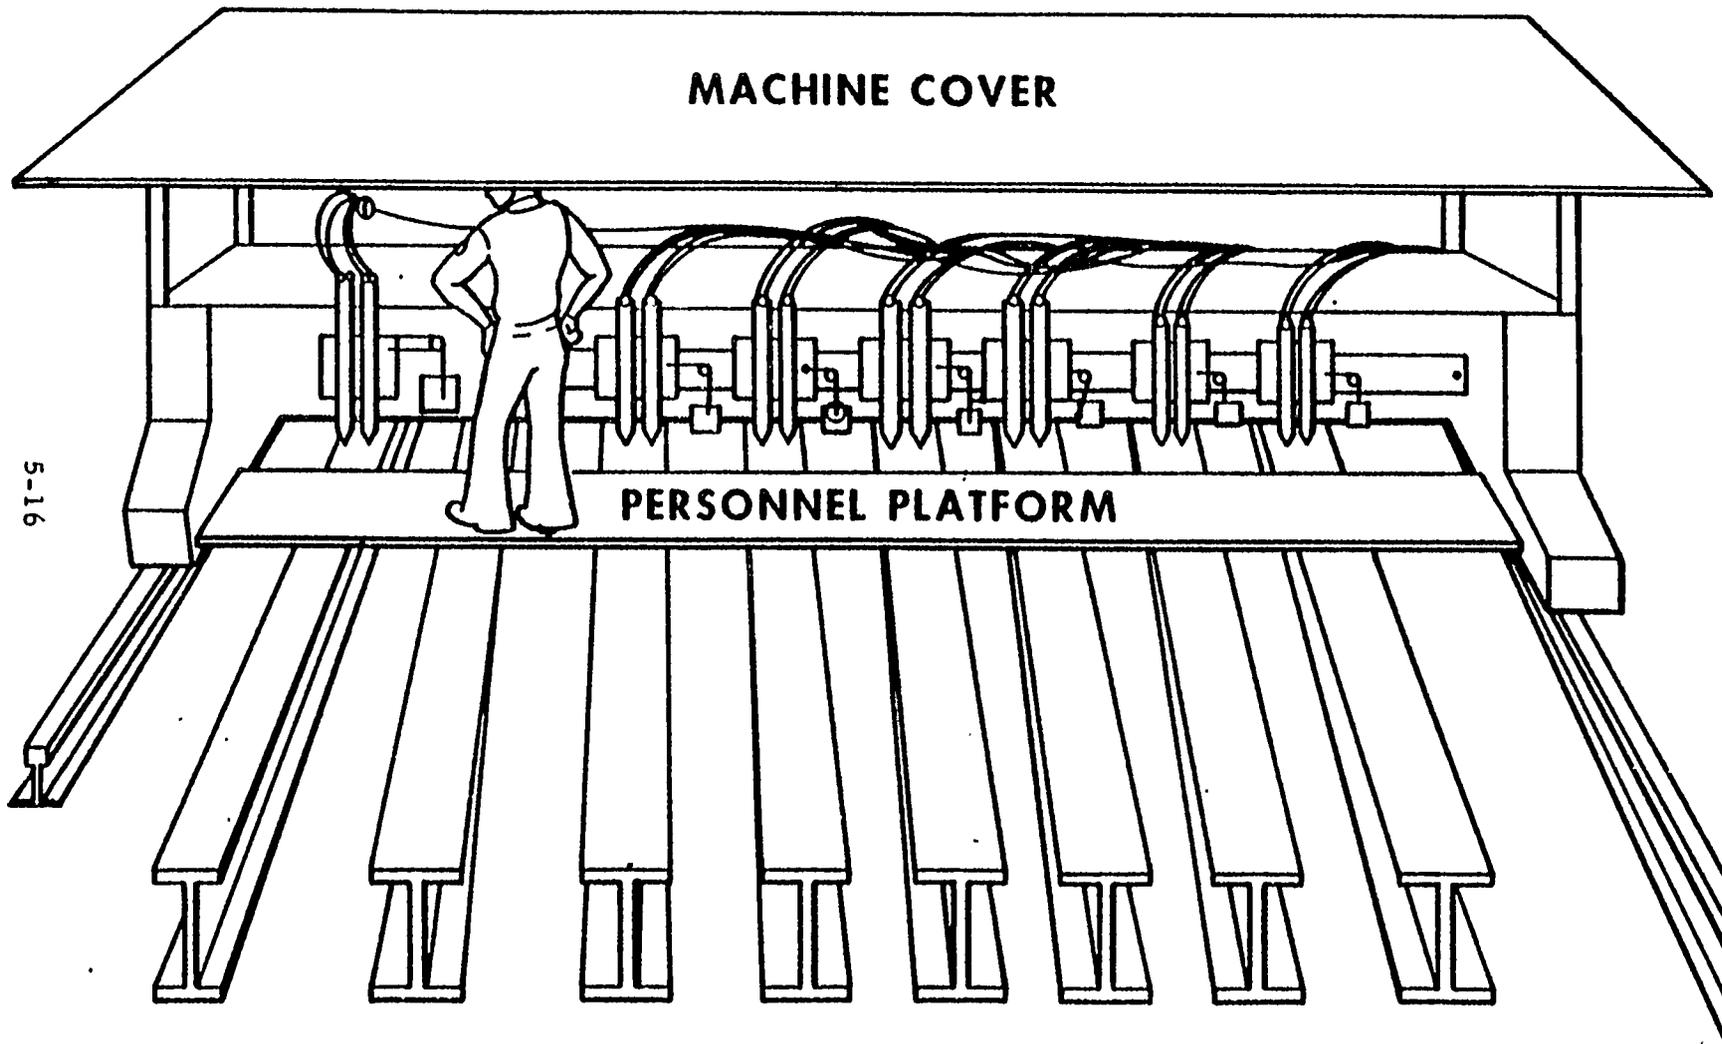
"I" Beam Stripping Machine (Series Production Method "A")
